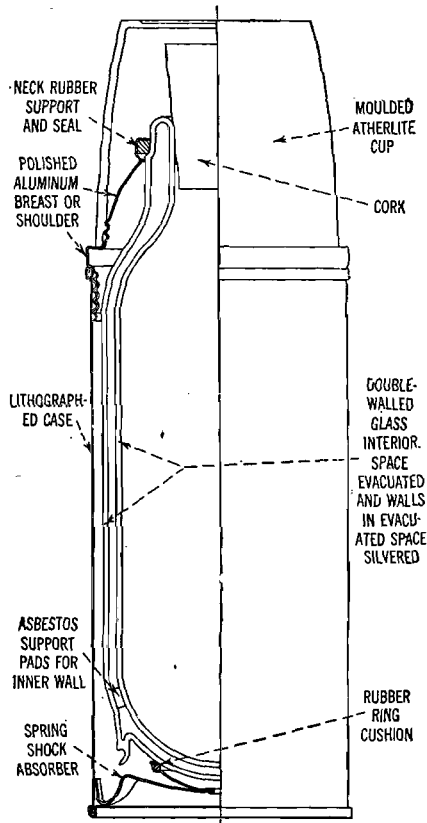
A vacuum bottle. (Courtesy American Thermos Bottle Company)
